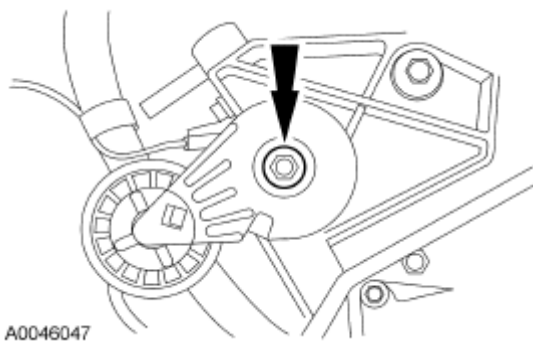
Accessory Drive Belt Tensioner And Install Bolt
